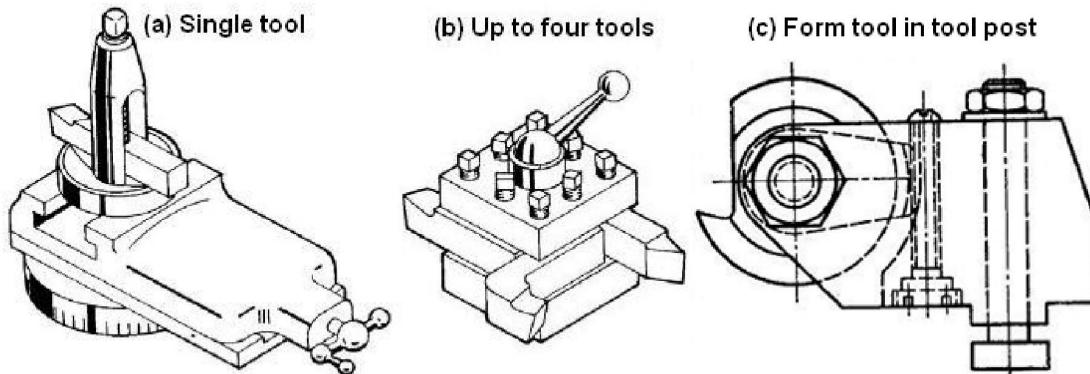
Mounting of (a and b) shank type tools in tool post and (c) form tool in tool post
